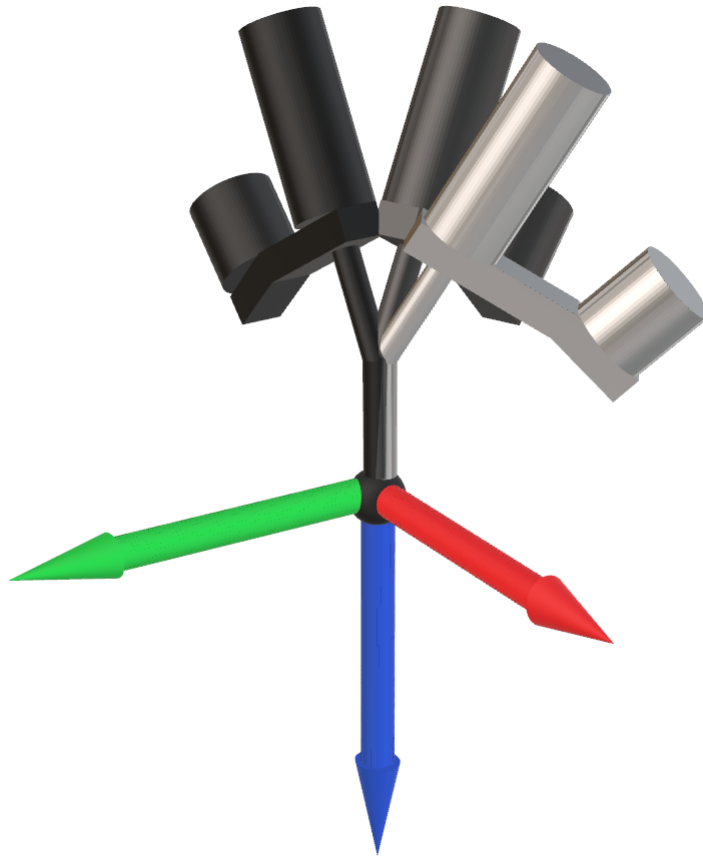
Three possible poses for the welding torch when using an axial-symmetric point.
